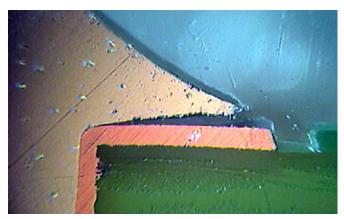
The solder crack joint often started from the far end of the through-hole joint.
